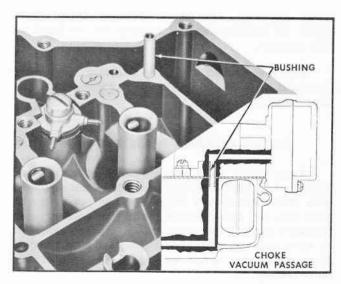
Bushing Installed in Carter 4-Barrel Carburetor
